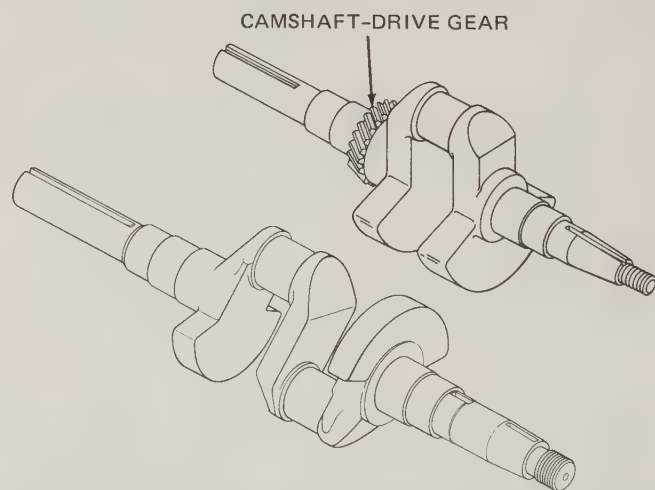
One-piece crankshaft (top) for a one-cylinder engine and (bottom) for a two-cylinder engine. (Kohler Company)
